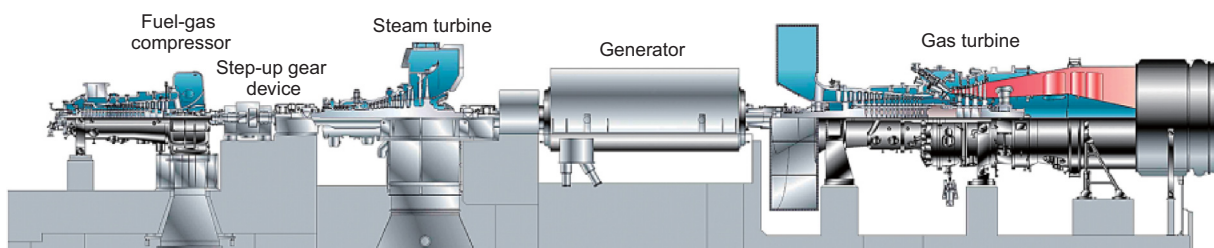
Longitudinal sectional drawing of complete assembly.
